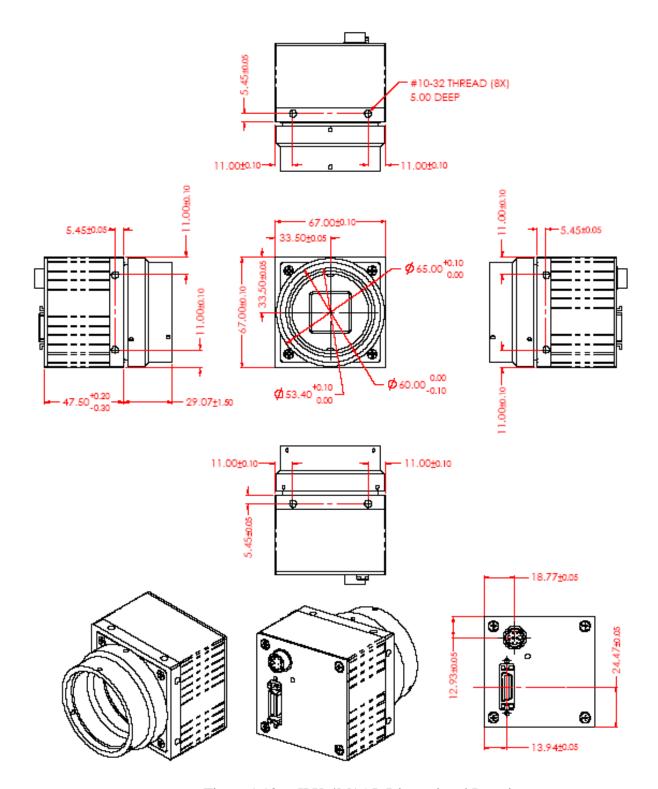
IPX-4M15-L Dimensional Drawings
